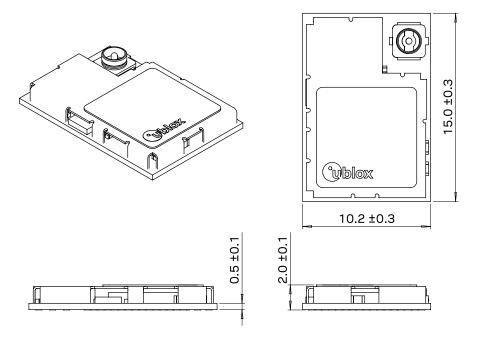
BMD-345 mechanical drawing (dimensions in mm)
